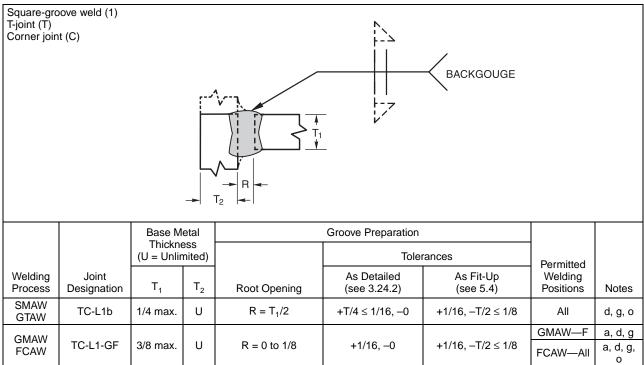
Prequalified CJP Groove Welded Joints—Nontubular (see 3.24.1)
